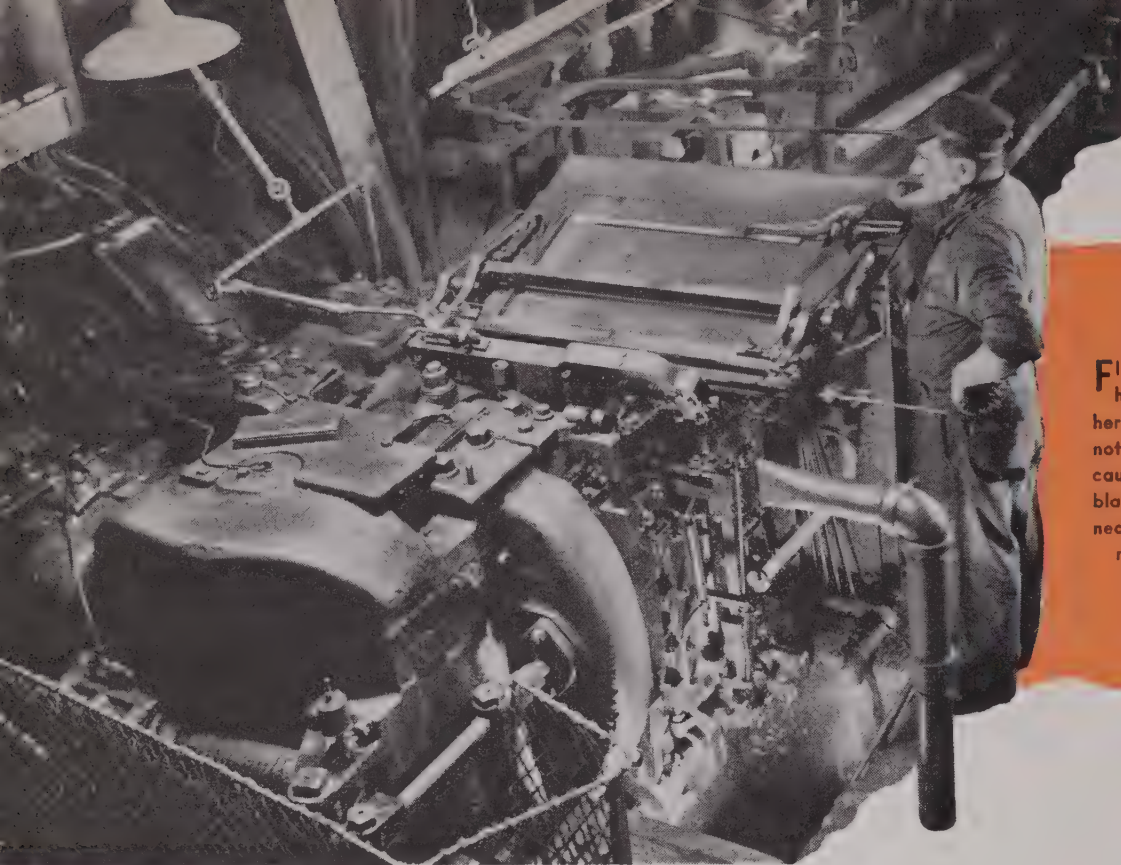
In hot heading, as shown here, the dies will not be affected because no change in blank OD sizes are necessary under the new standards.
